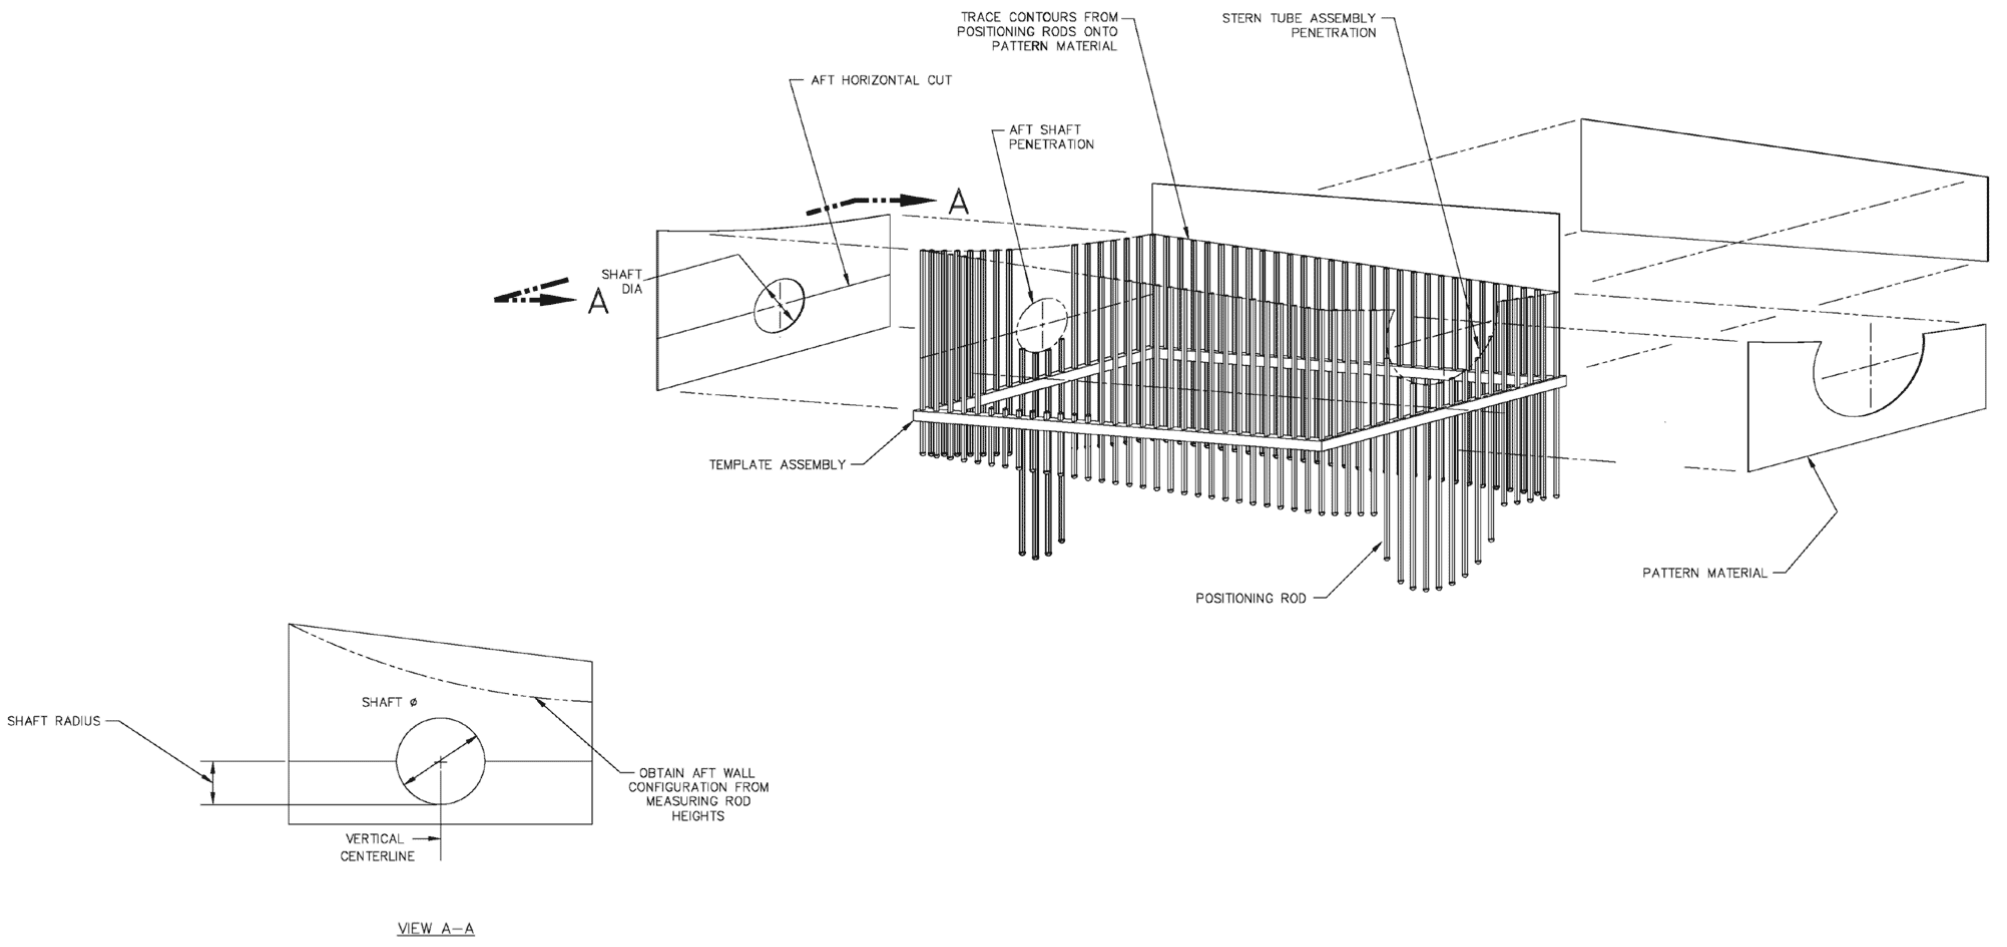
NAVSEA Drawing 6698079 - Pattern Making from Fixture. 16-49 (16-50 blank)
